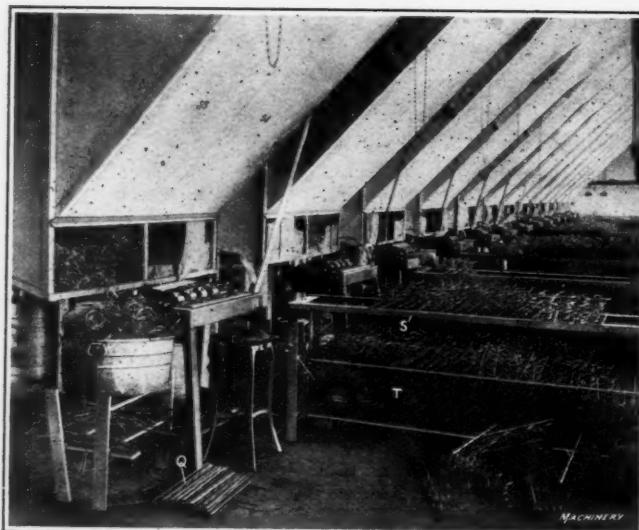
Forming Springs into Strips ready for assembling into Frames
